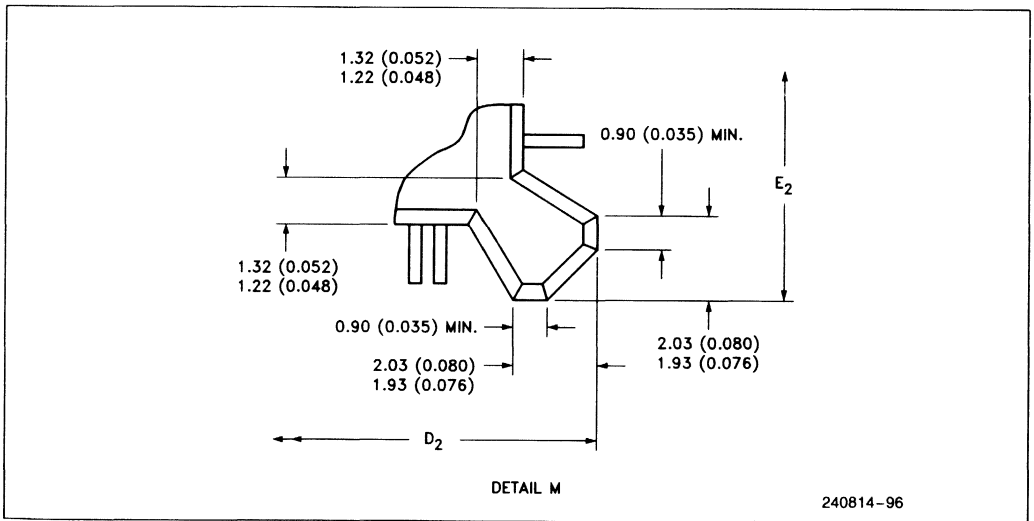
196-Lead PQFP Mechanical Package Detail—Protective Bumper
